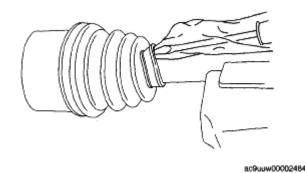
Lifting Boot With Cloth Wrapped Screwdriver Courtesy of MAZDA MOTORS CORP.
